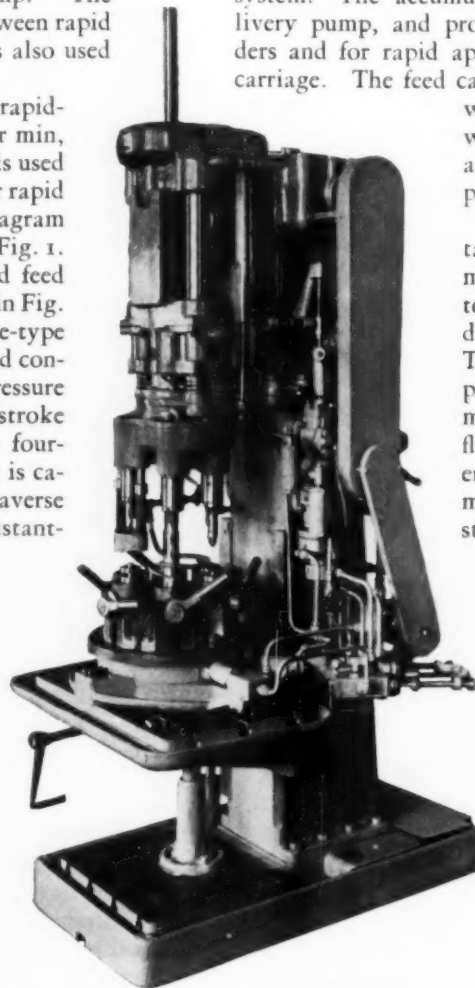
AUTOMATIC DRILLING MACHINE WITH HYDRAULICALLY OPERATED INDEXING TABLE
